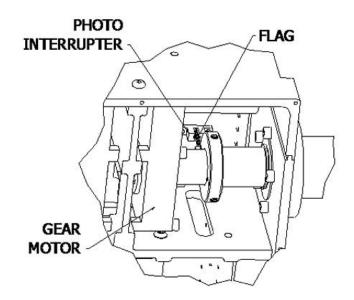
Dual-Tilt Photo Interrupter and Flag (cover removed)
